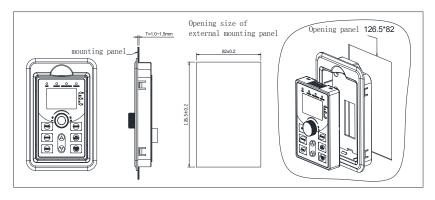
PI550-E keyboard installation open inlet dimension(mm)
